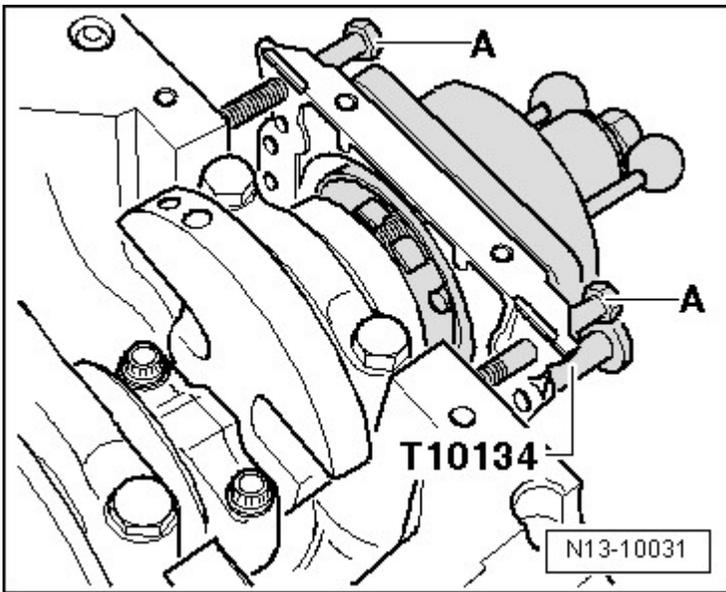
Identifying Bolts Screwed Into Cylinder Block To Guide Sealing Flange
